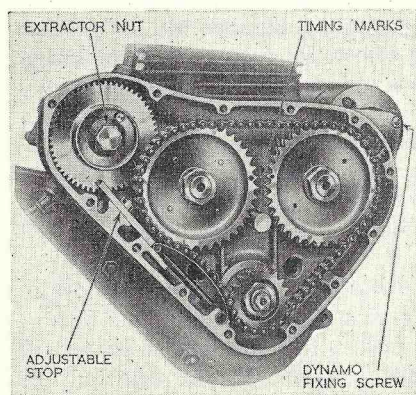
500-C.C. TWIN TIMING GEAR, SHOWING ADJUSTABLE STOP PLATE.
